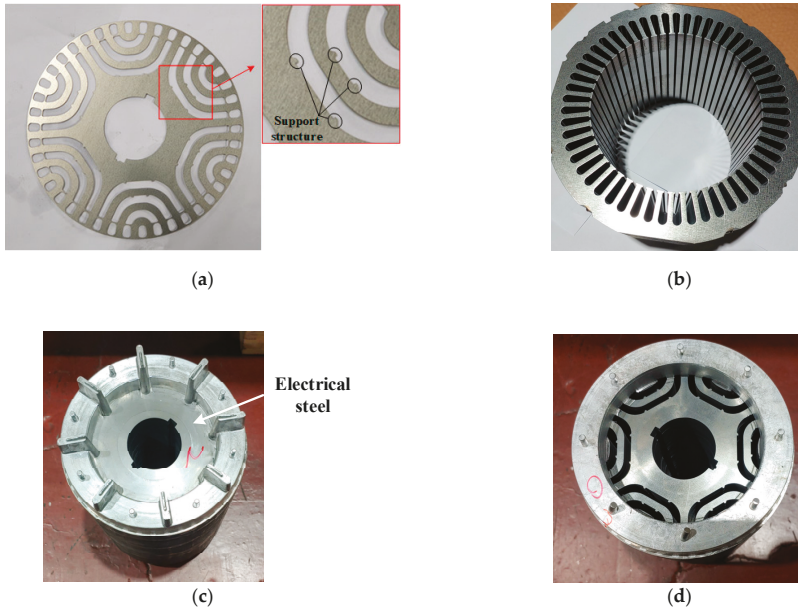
Manufacture LS-PMA-SynRM: (a) rotor core, (b) stator, (c) rotor before removing the electrical steel, and (d) rotor after removing the electrical steel.
